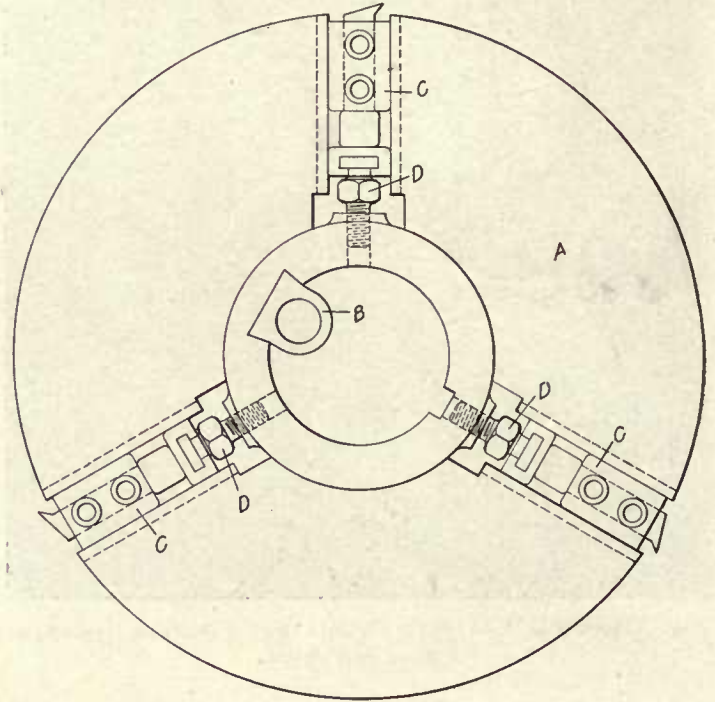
Tool Head for Boring Piston Valve Chambers.
